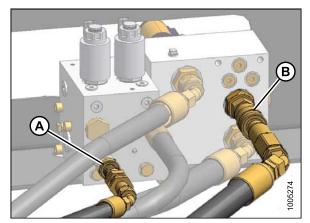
M150 without Reverser Valve (M155 Similar)
